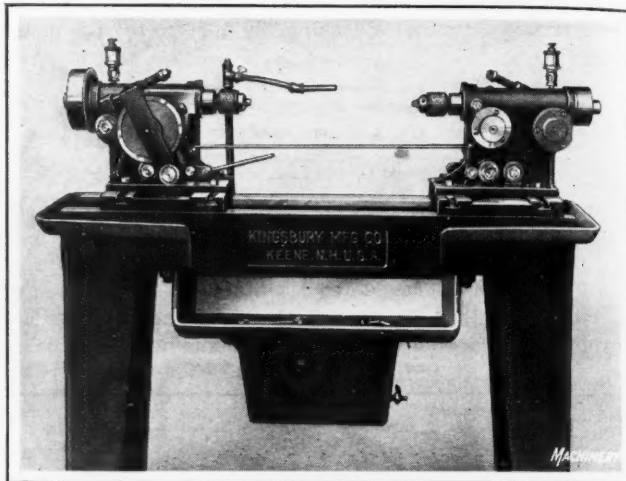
Kingsbury Automatic Sensitive Drilling Machine with Opposed Heads
